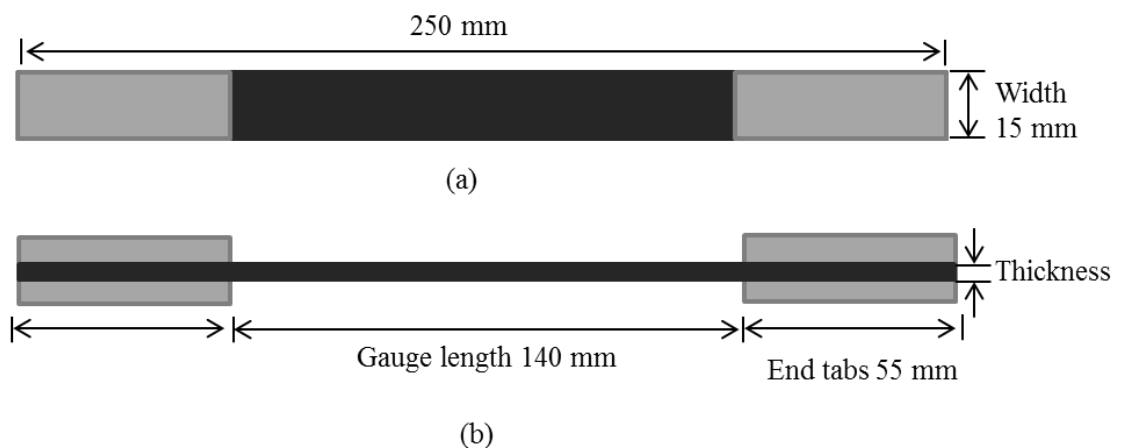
Dimension of the test specimen used for tensile testing (a) top view and (b) side view.
